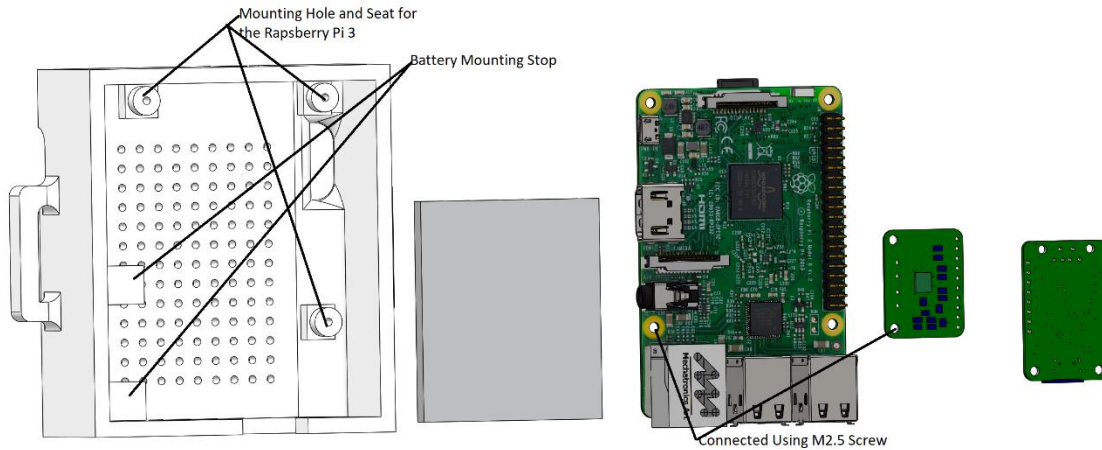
Exploded view of the back enclosure excluding screws and Plexiglas cover.
